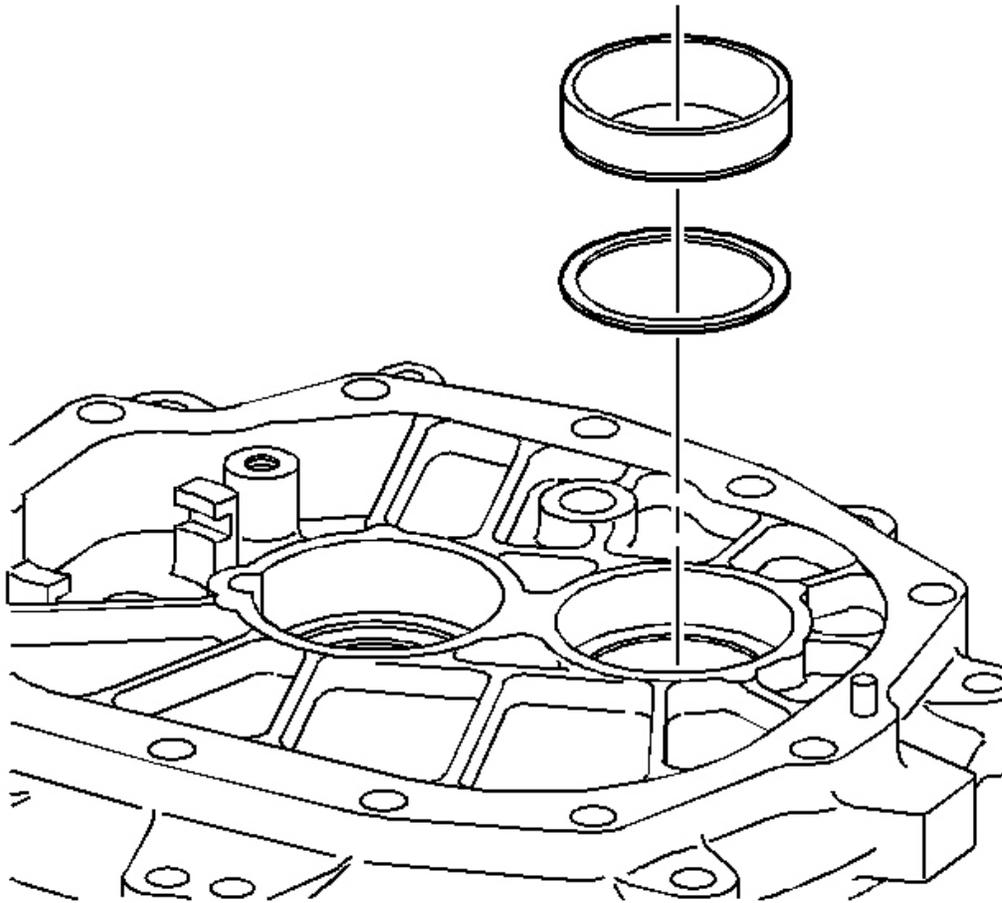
Identifying Countershaft Bearing Shim & Bearing Race
